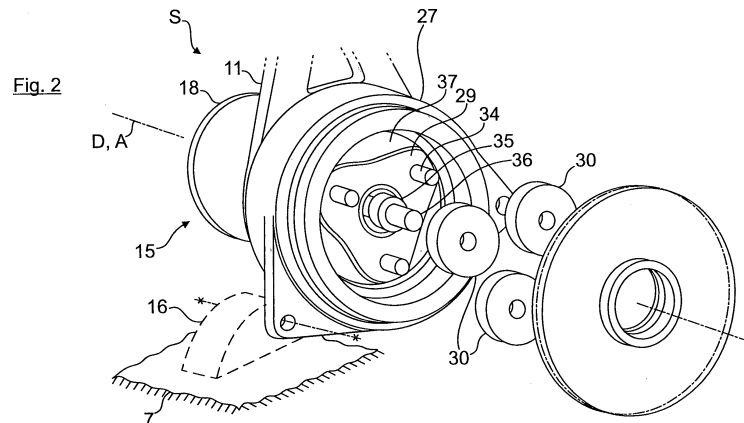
rotary damper with the planetary gearbox, Audi patent 2010 [5]
